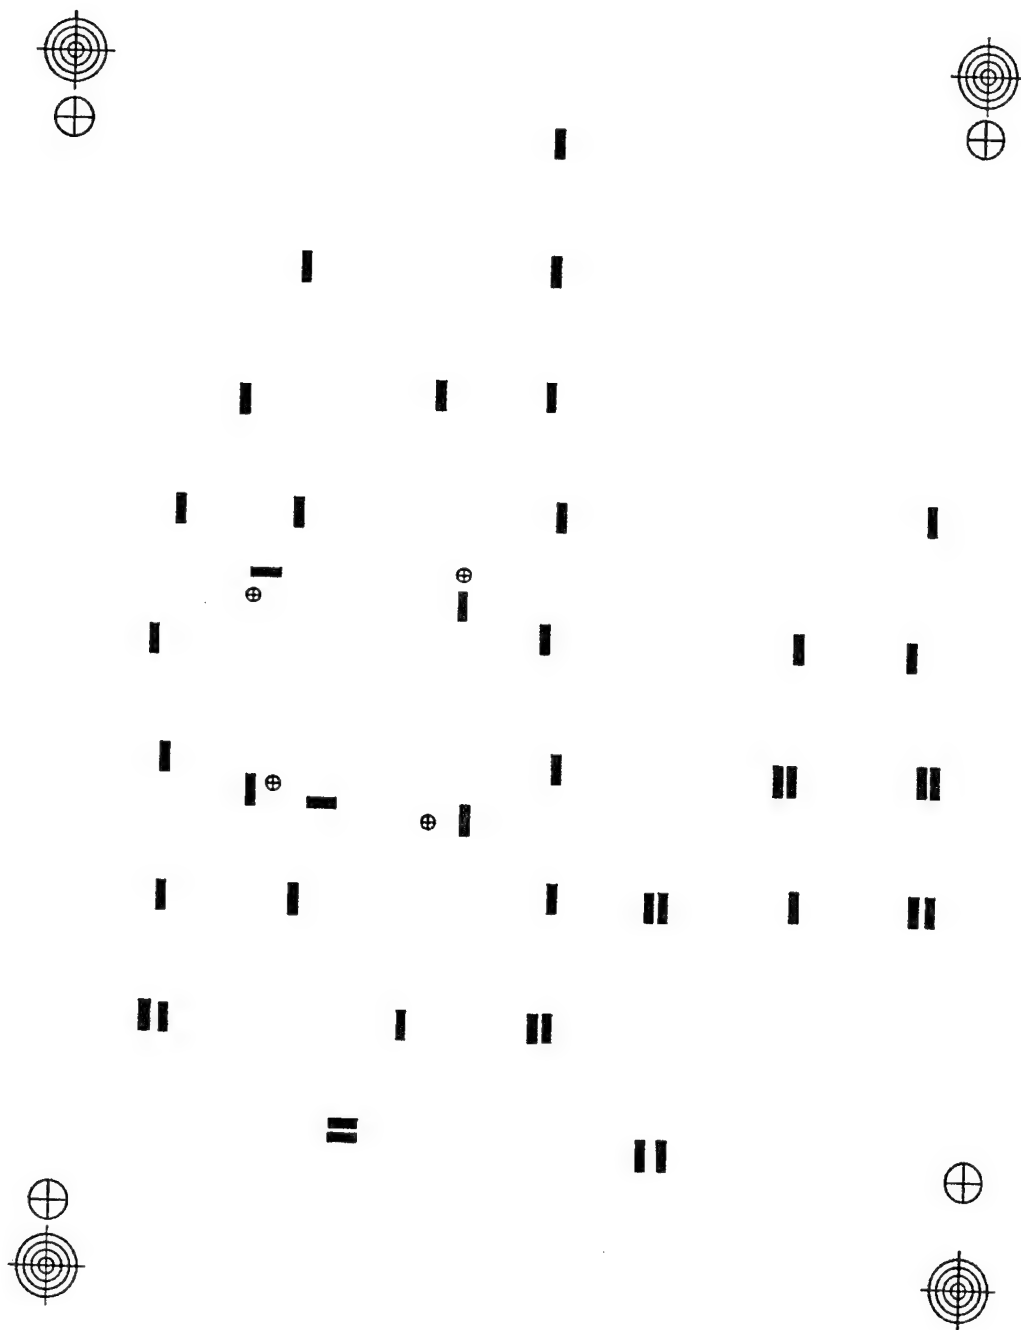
BOTTOM ASSEMBLY LAYER
